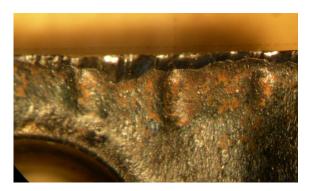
A picture of worn carbide insert of type 8230 carbide insert
